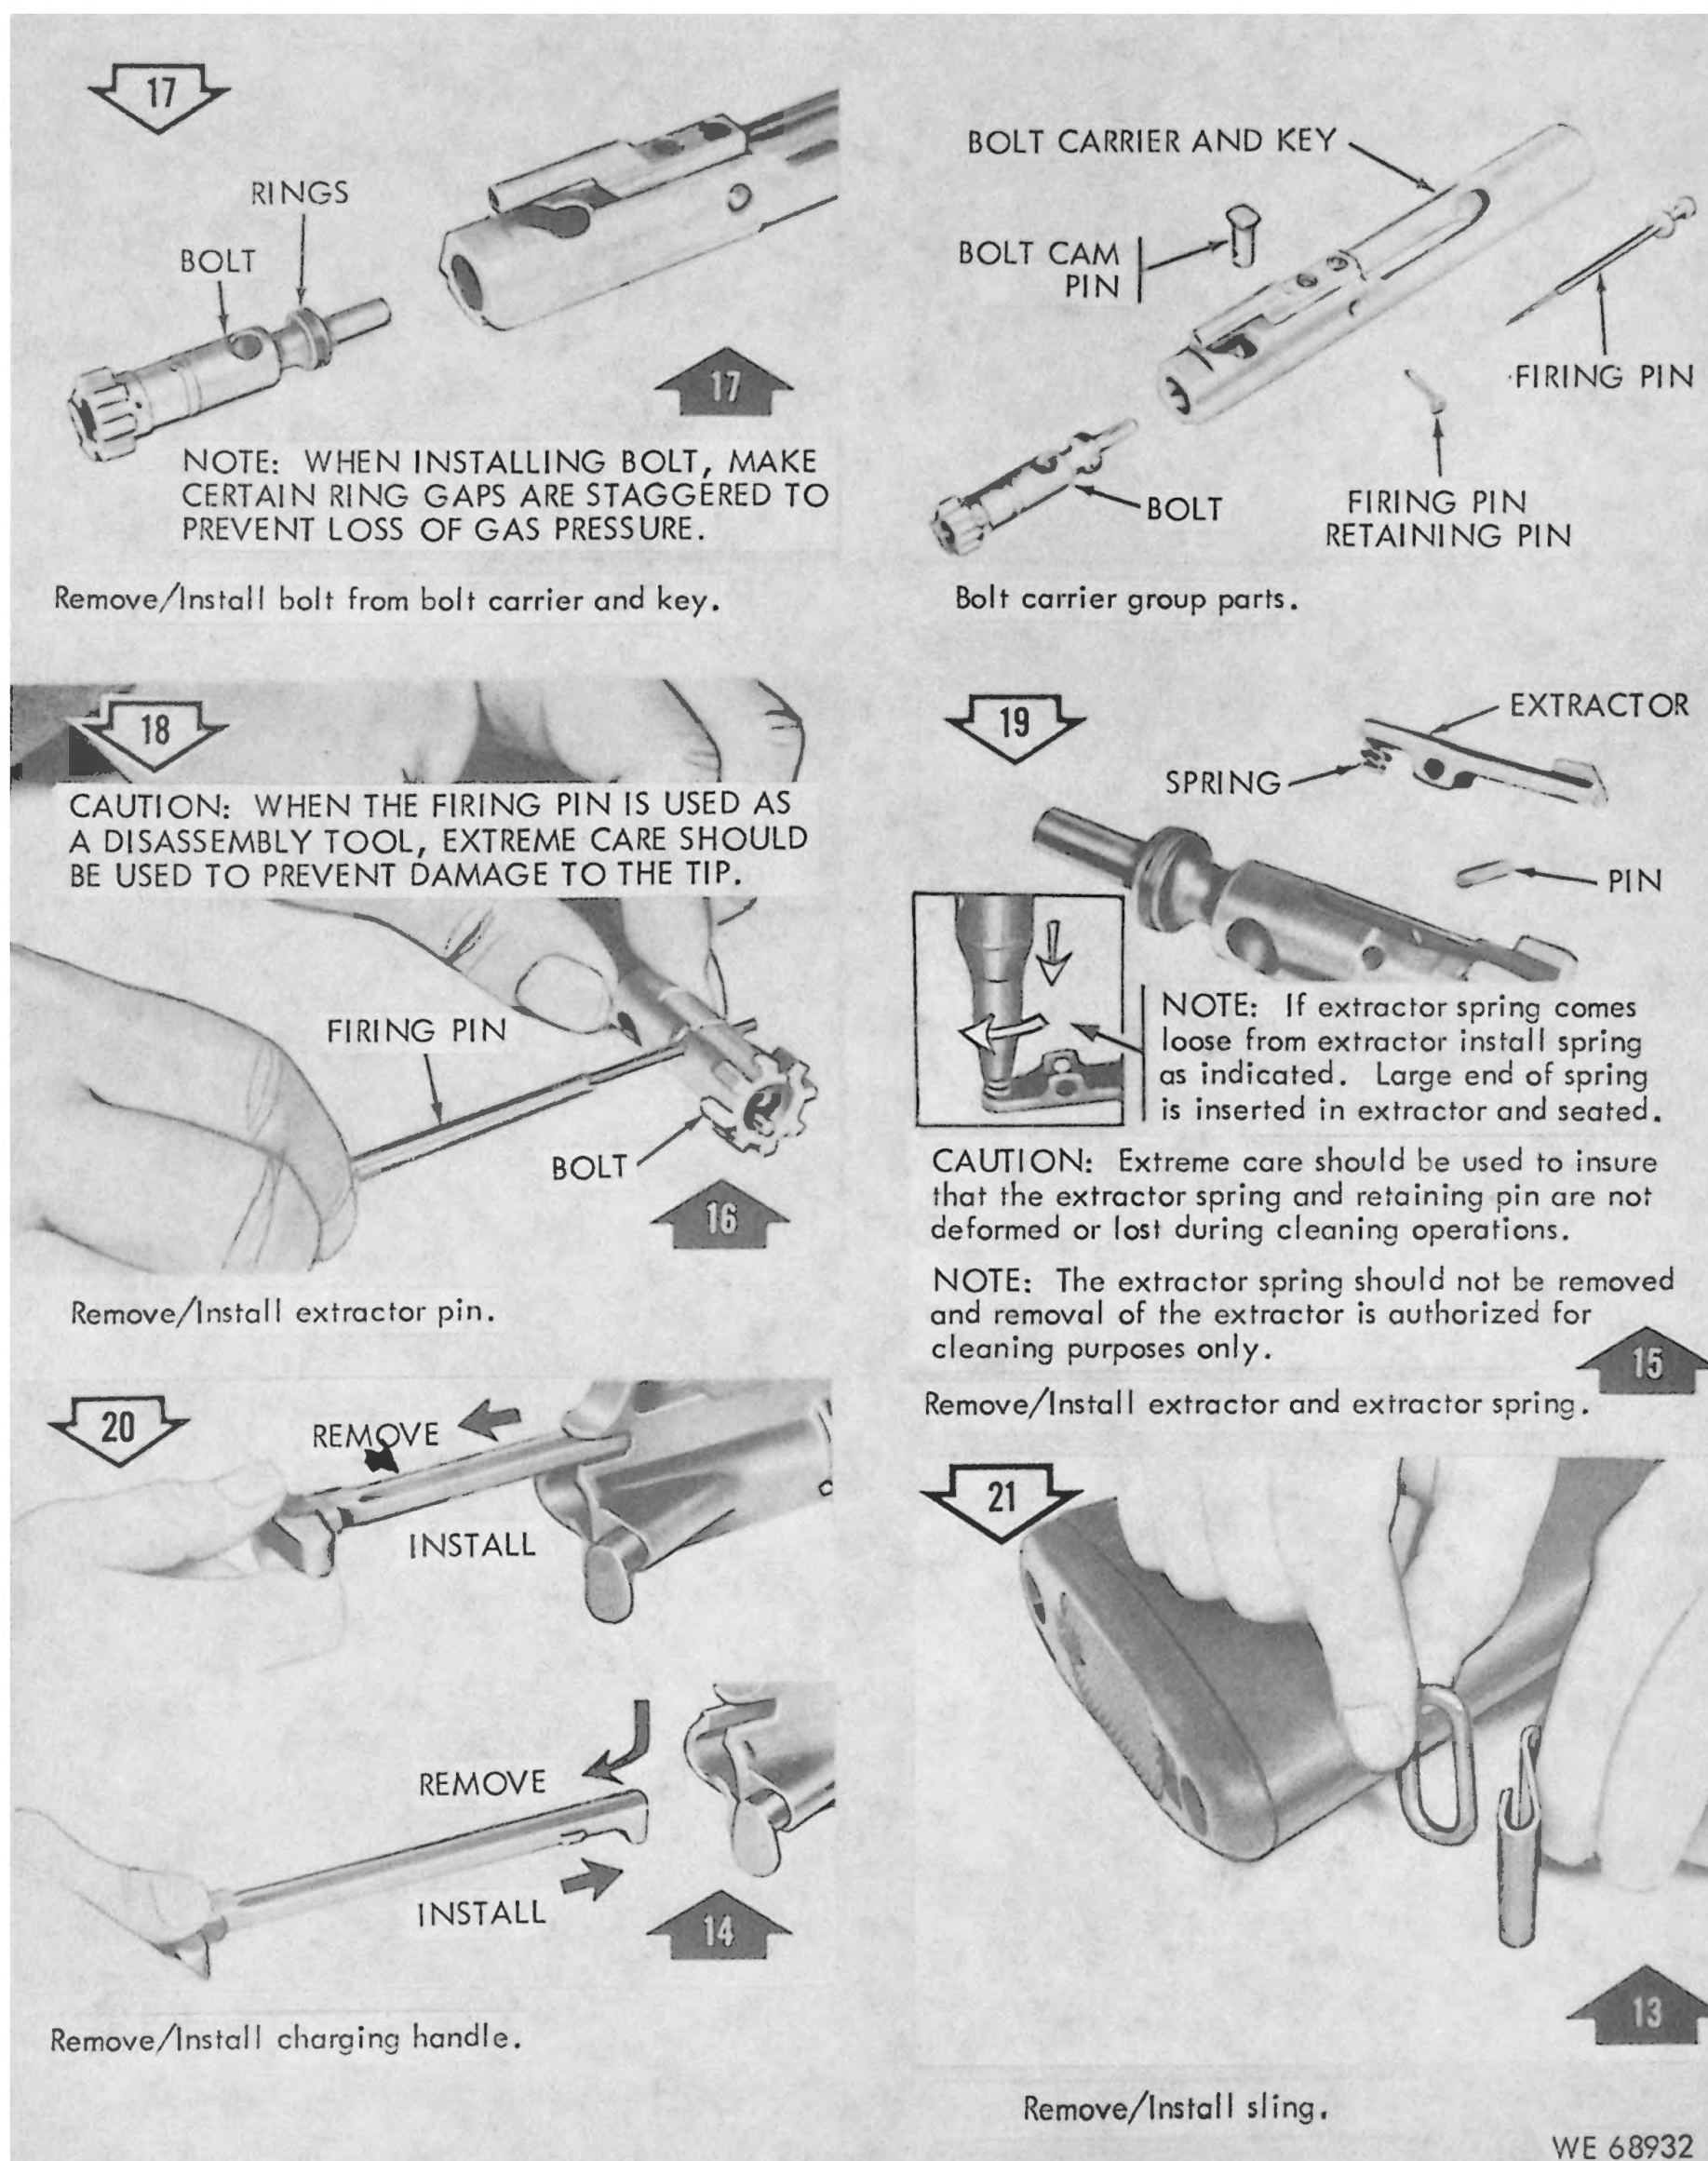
Disassembly/assembly of rifle. (4 of 8)
